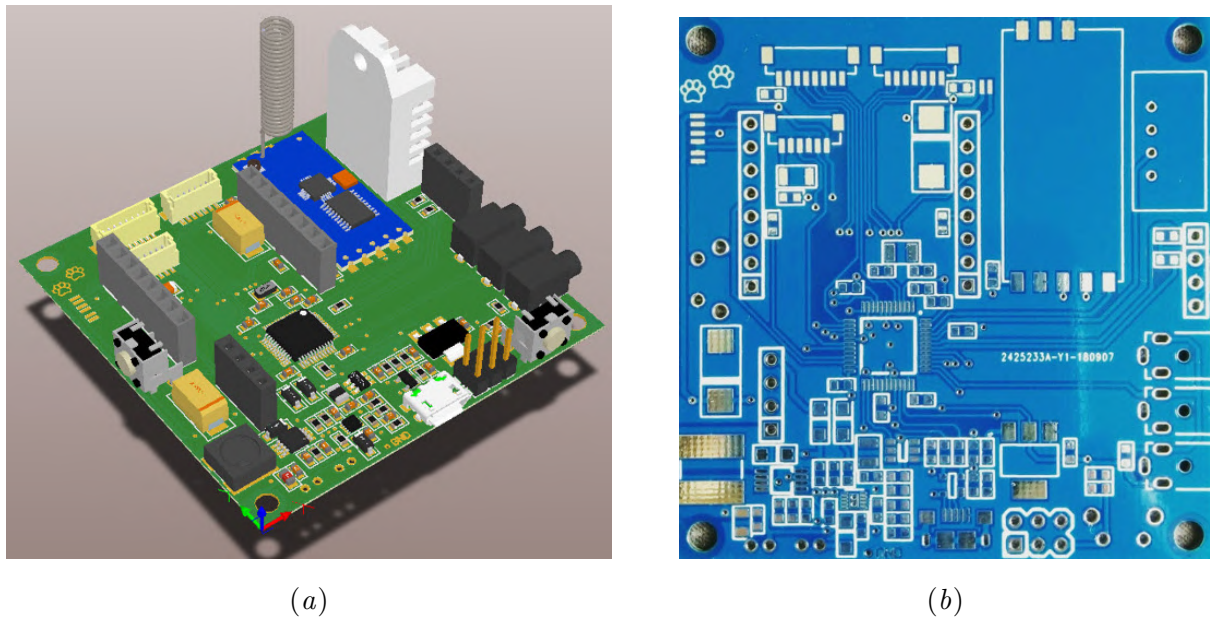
Measurement module board: (a) 3D model of the board; (b) PCB manufactured by JLCPCB factory.
